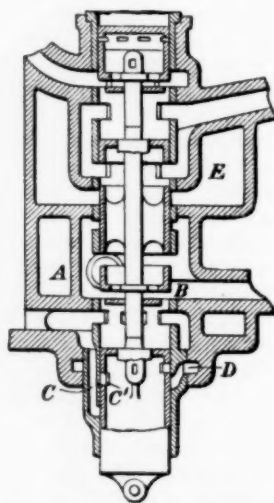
OPERATING VALVE OF SINGLE-BLOW PNEUMATIC FORGING HAMMER
